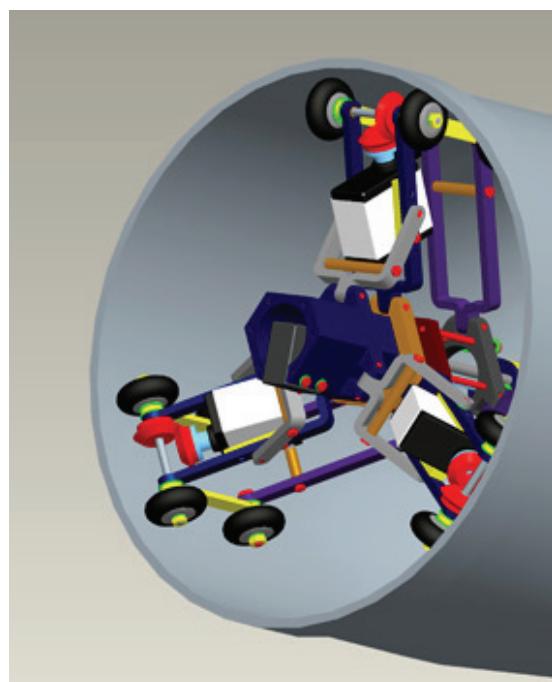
Model of the adaptable in-pipe machine inside the pipe [1]
